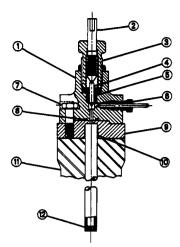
Schematic drawing of Roe's Ti alloy valve and sapphire tube assembly: (1) valve body, (2) valve stem drive handle, (3) stem drive and packing gland, (4) nonrotating stem, (5) packing assembly, (6) gas inlet port for 1/16-in. tubing, (7) assembly screw (total of four), (8) Viton O-ring seal, (9) tube mounting flange, (10) epoxy sealant, (11) spinner turbine, (12) sapphire tube (reprinted from ref 25; copyright 1985 Academic).
